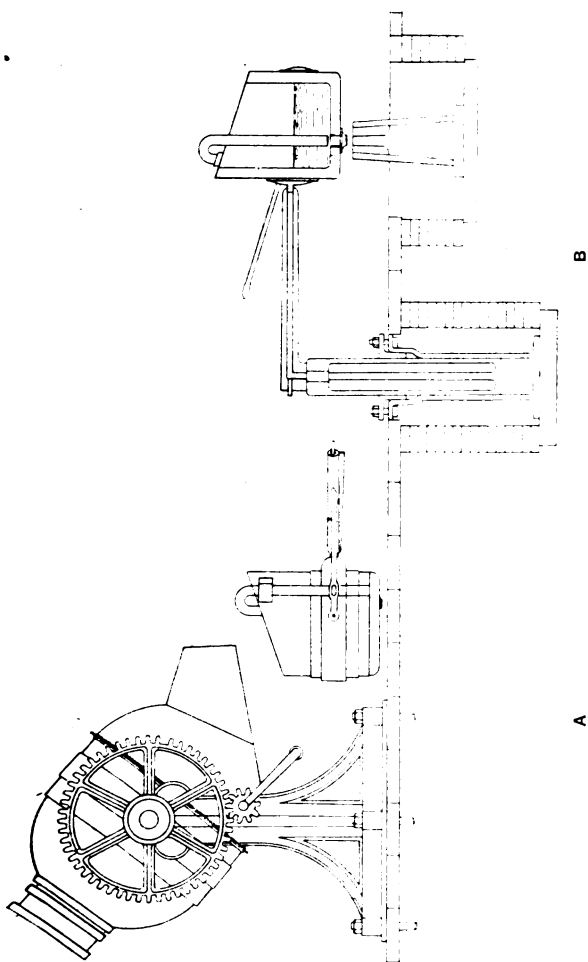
Early form of Bessemer plant. A—Converter and ladle. B—Ladle and crane in section
